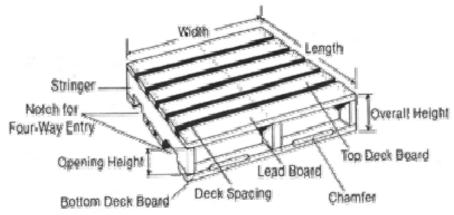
Stringer Pallet Construction (Larson Pallet & Crating, 2006)
